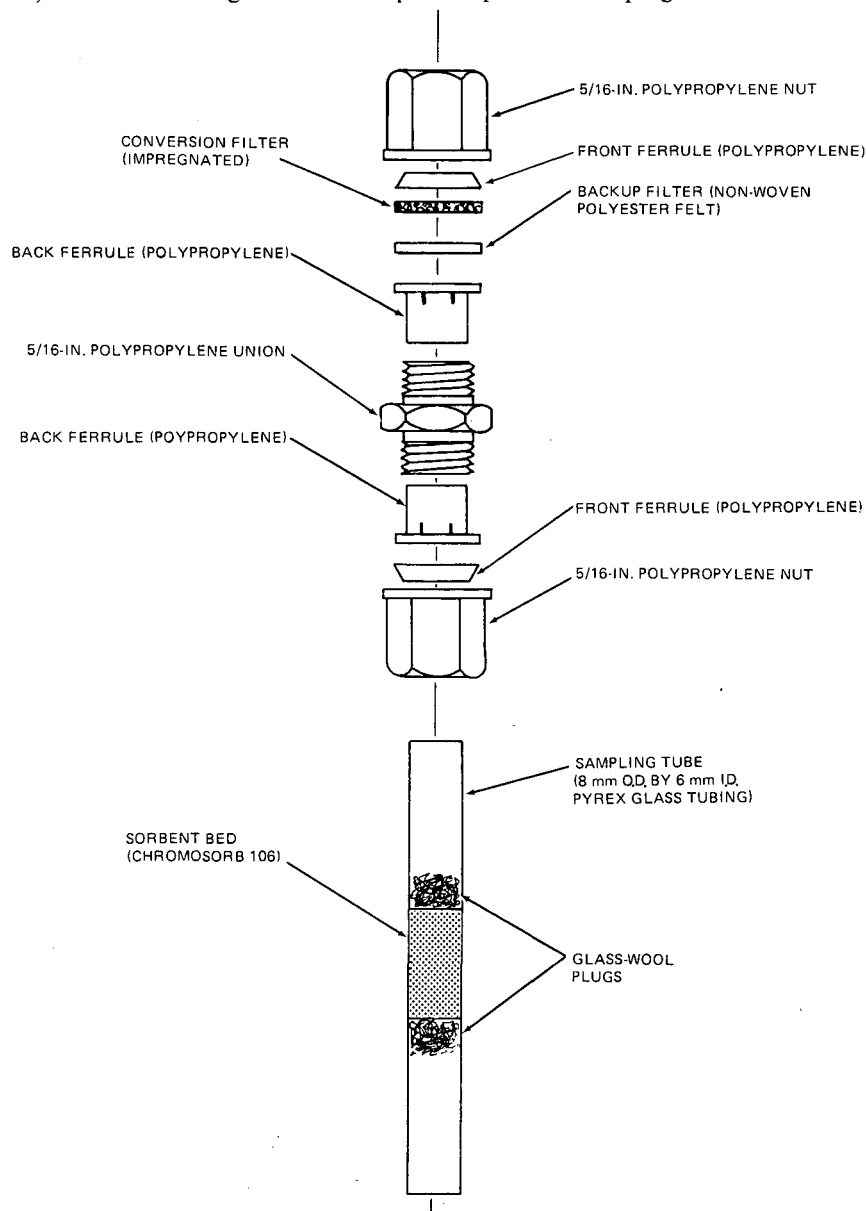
Construction of the V-to-G conversion filter and attachment of the filter to the sampling tube.
